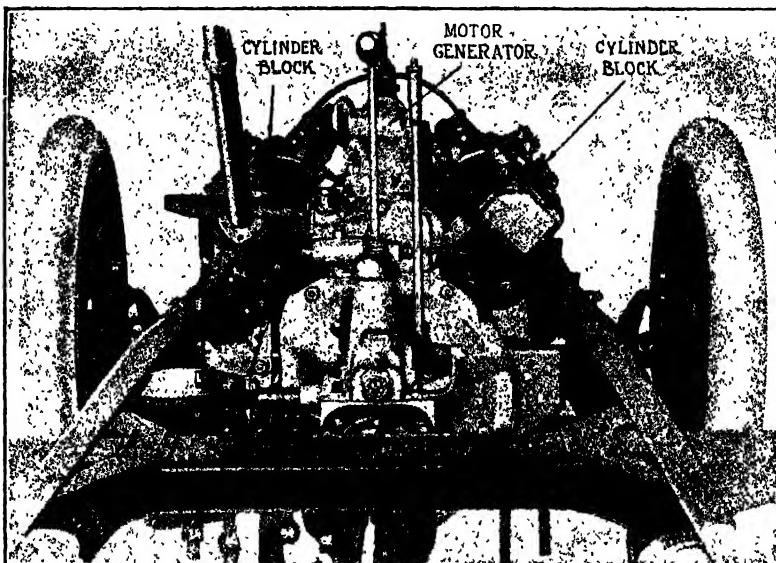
Rear View of Cadillac Eight Cylinder V Engine Installed in Frame.
